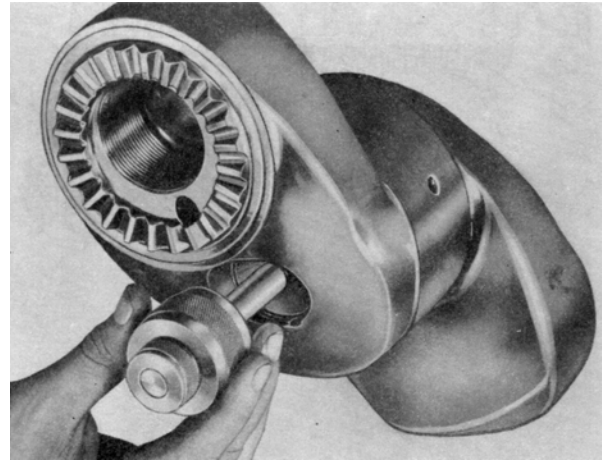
"C" series Crankshaft (Pratt & Whitney)
